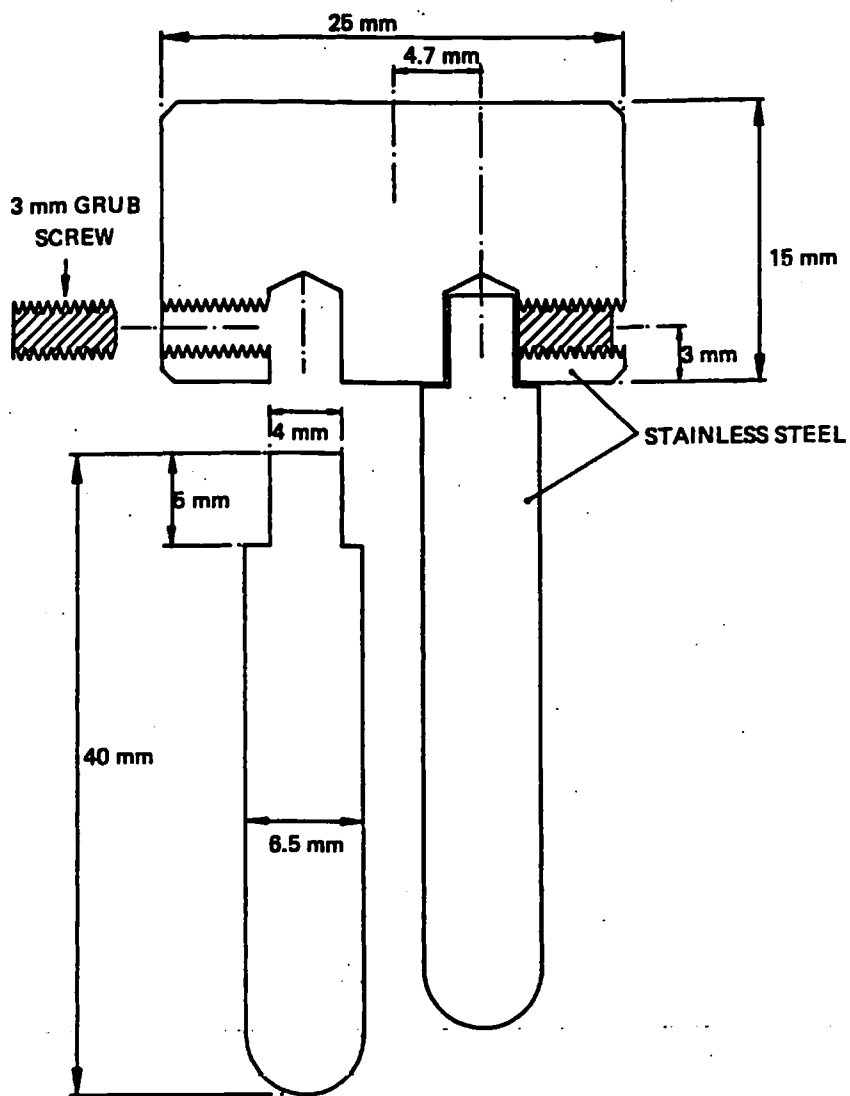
Dimensions for the plunger assembly of the DSC pan centring tool.
